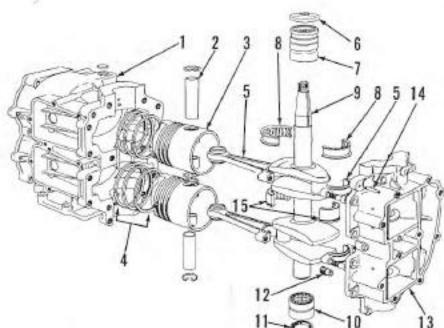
Exploded view of power head used on Fleet Scott models.
